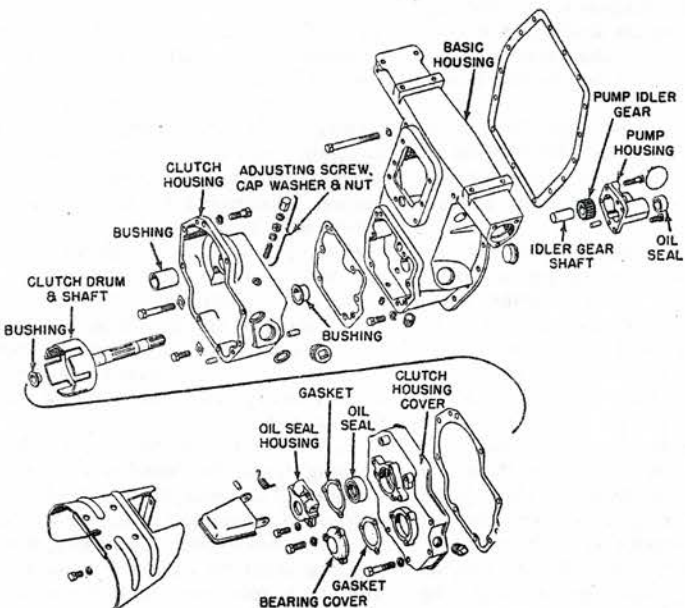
E Exploded view of Model 60 engine-driven power shaft clutch housing and cover. Model 50 is similar
